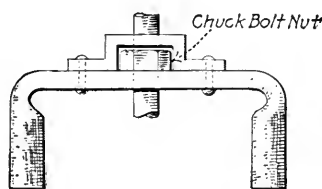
HANDLE FOR CHUCK NUT ON SWING PISTON.
